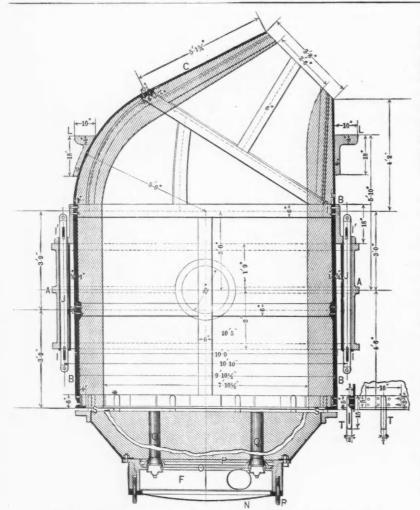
10-TON CONVERTER WITH REMOVABLE SHELL, NORTH CHICAGO STEEL CO.
